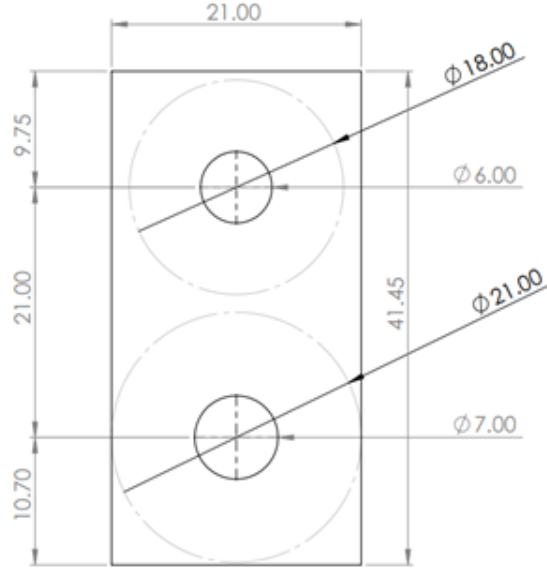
Nozzle plane for TriCoil™ test duct (all dimensions are in inches)
